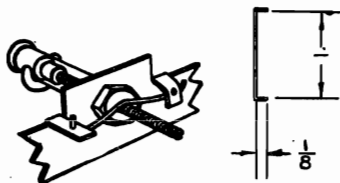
, left, shows the music wire spring applied to the adjusting screw.
